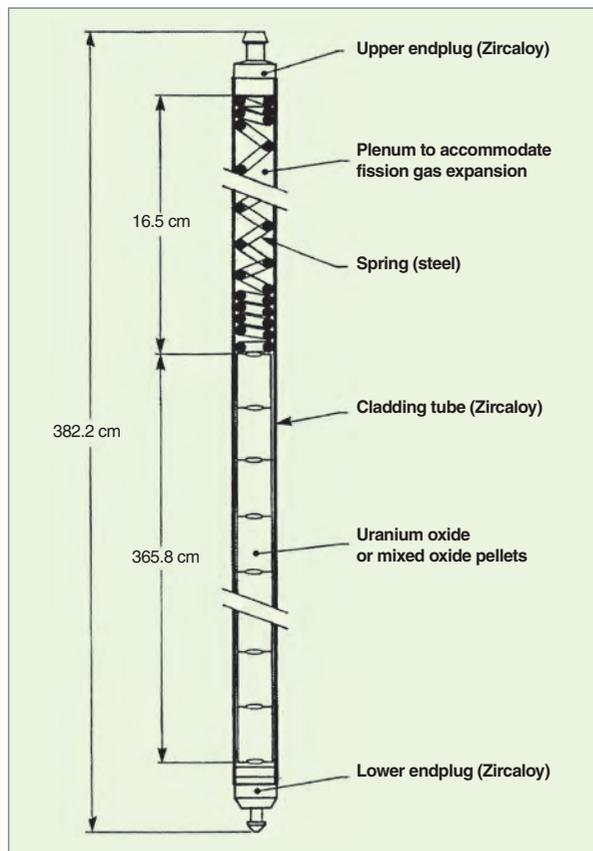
Schematic of a fuel rod (showing the dimensions for a 900-MW PWR [EDF] rod).
